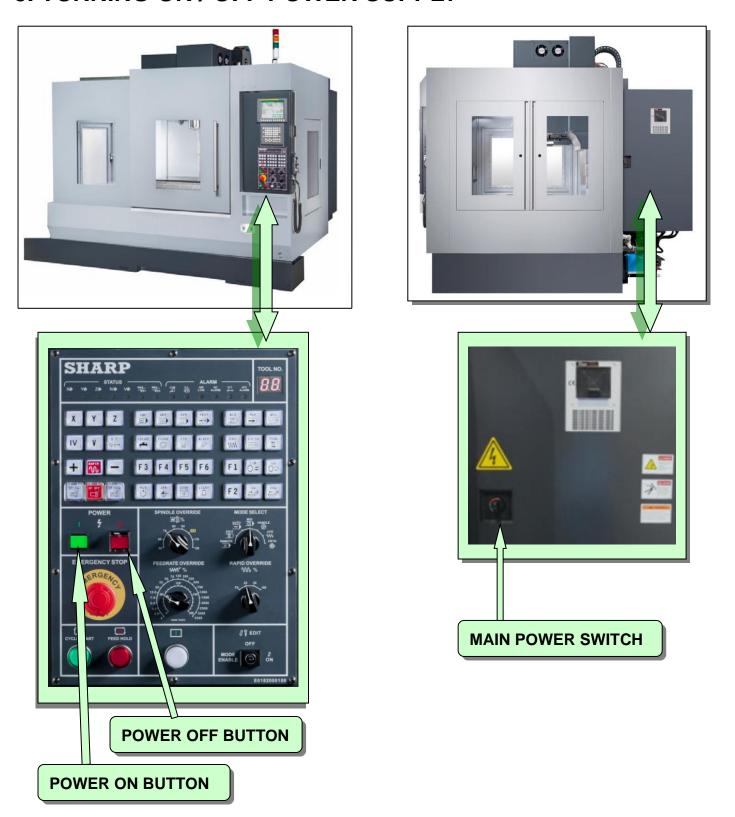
LOCATION OF POWER SUPPLY SWITCH AND BUTTON
